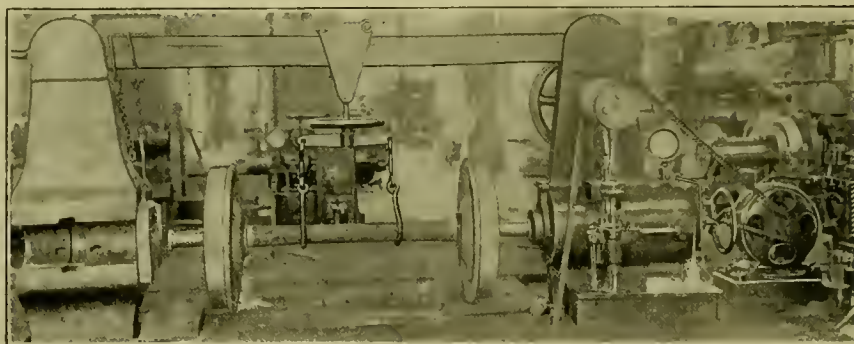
MOTOR DRIVE APPLIED TO NILES WHEEL PRESS.
